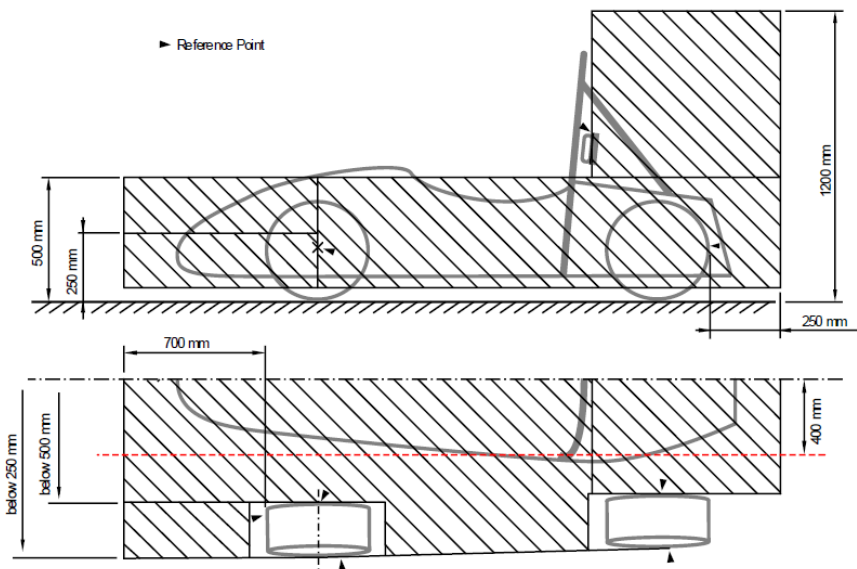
Maximum dimensions and positioning of aerodynamic devices.
